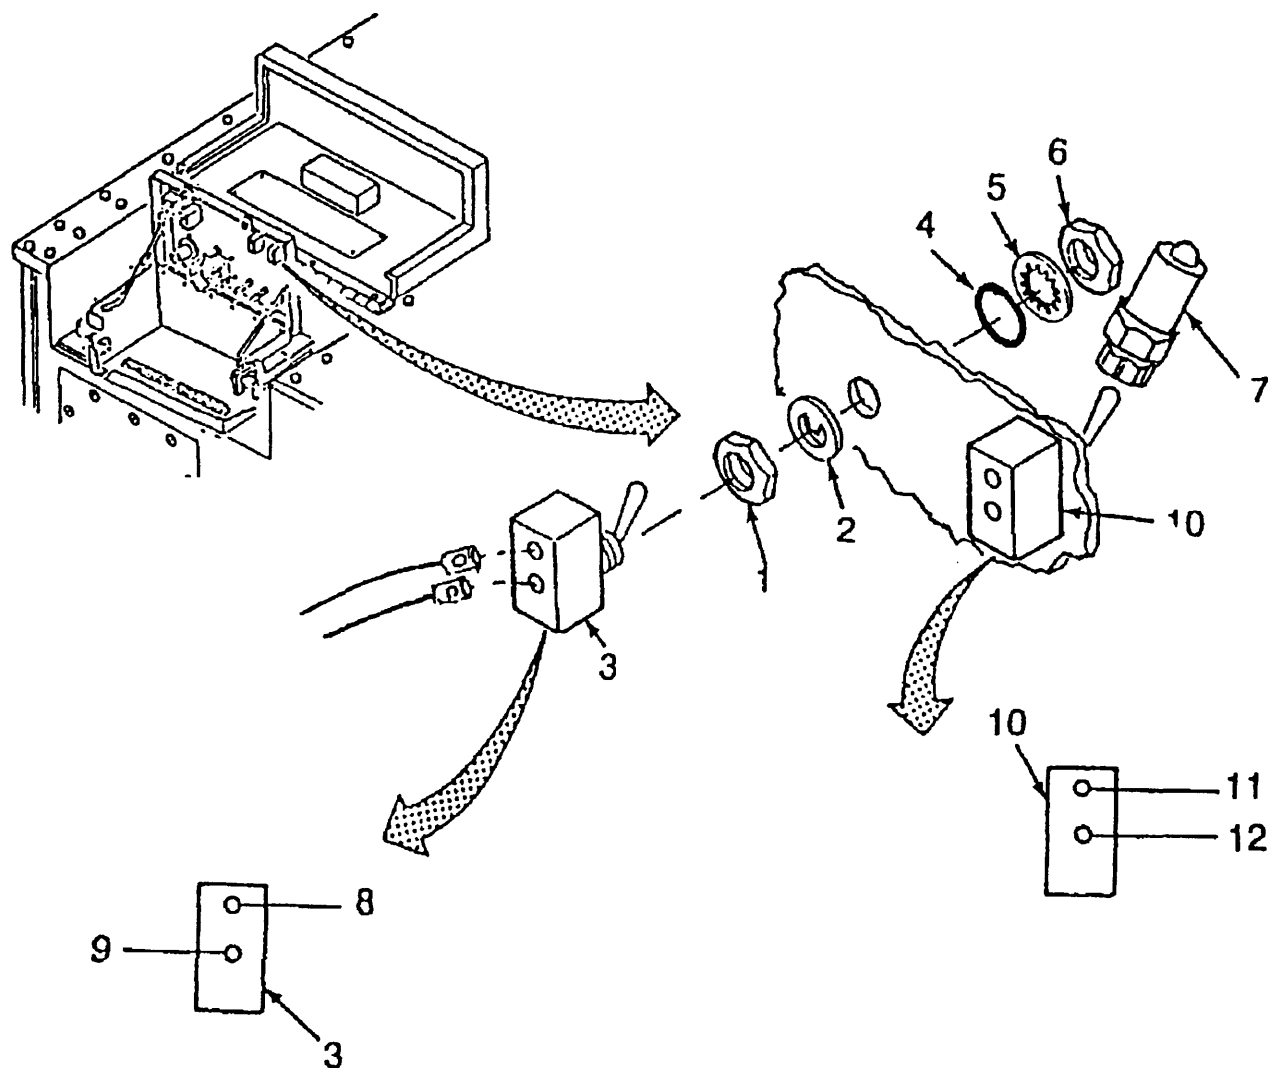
Control Box Assembly, Purge and Flame Reset Switches
